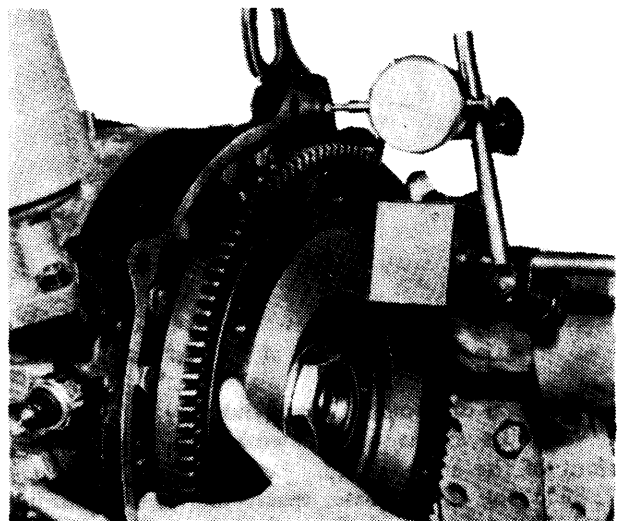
Measuring Eccentric Shaft End Play with a Dial Indicator
